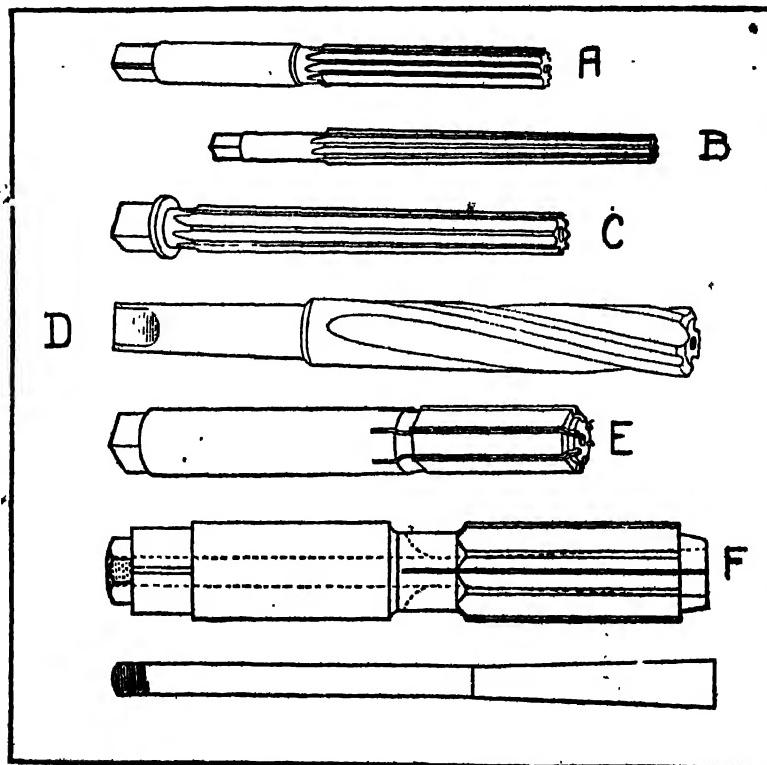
Illustrating Standard Forms of Hand and Machine Reamers.
